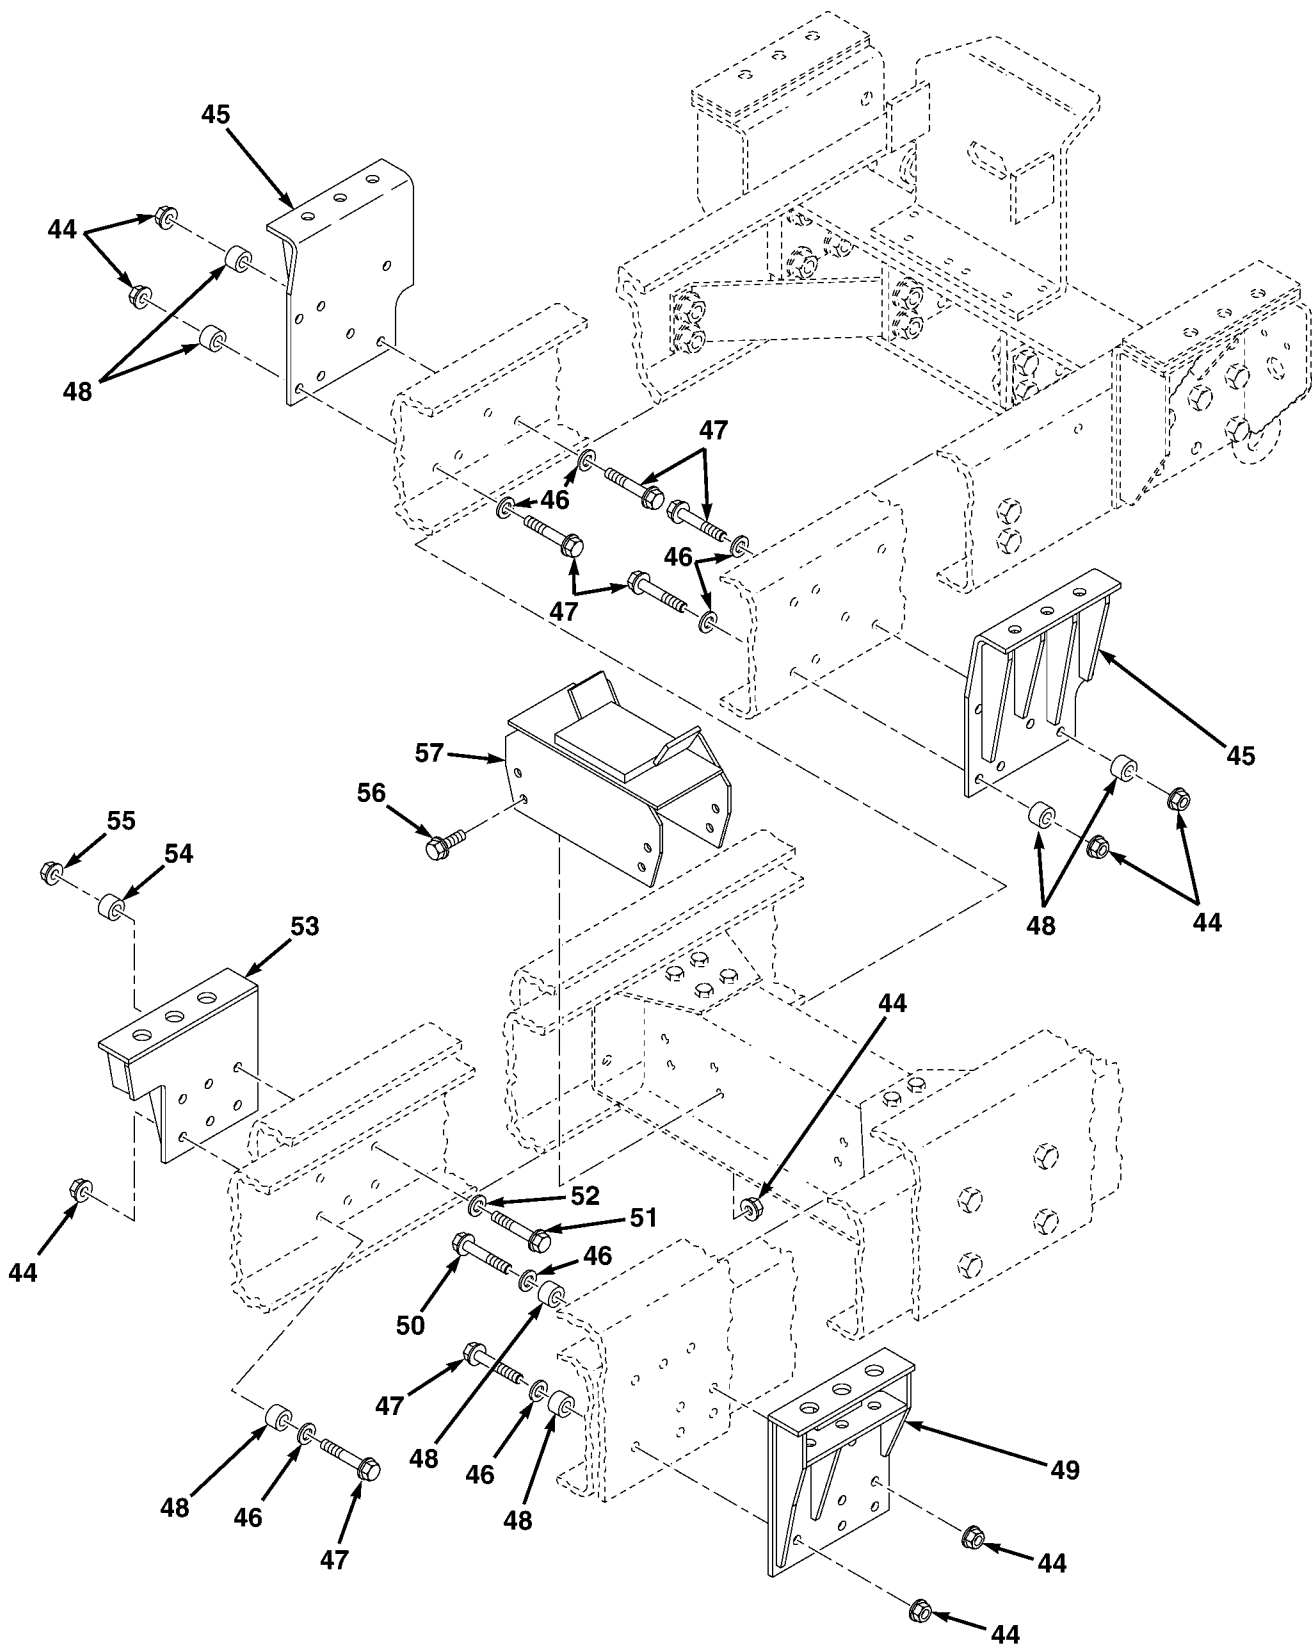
LOAD HANDLING SYSTEM (SHEET 2 OF 2)
